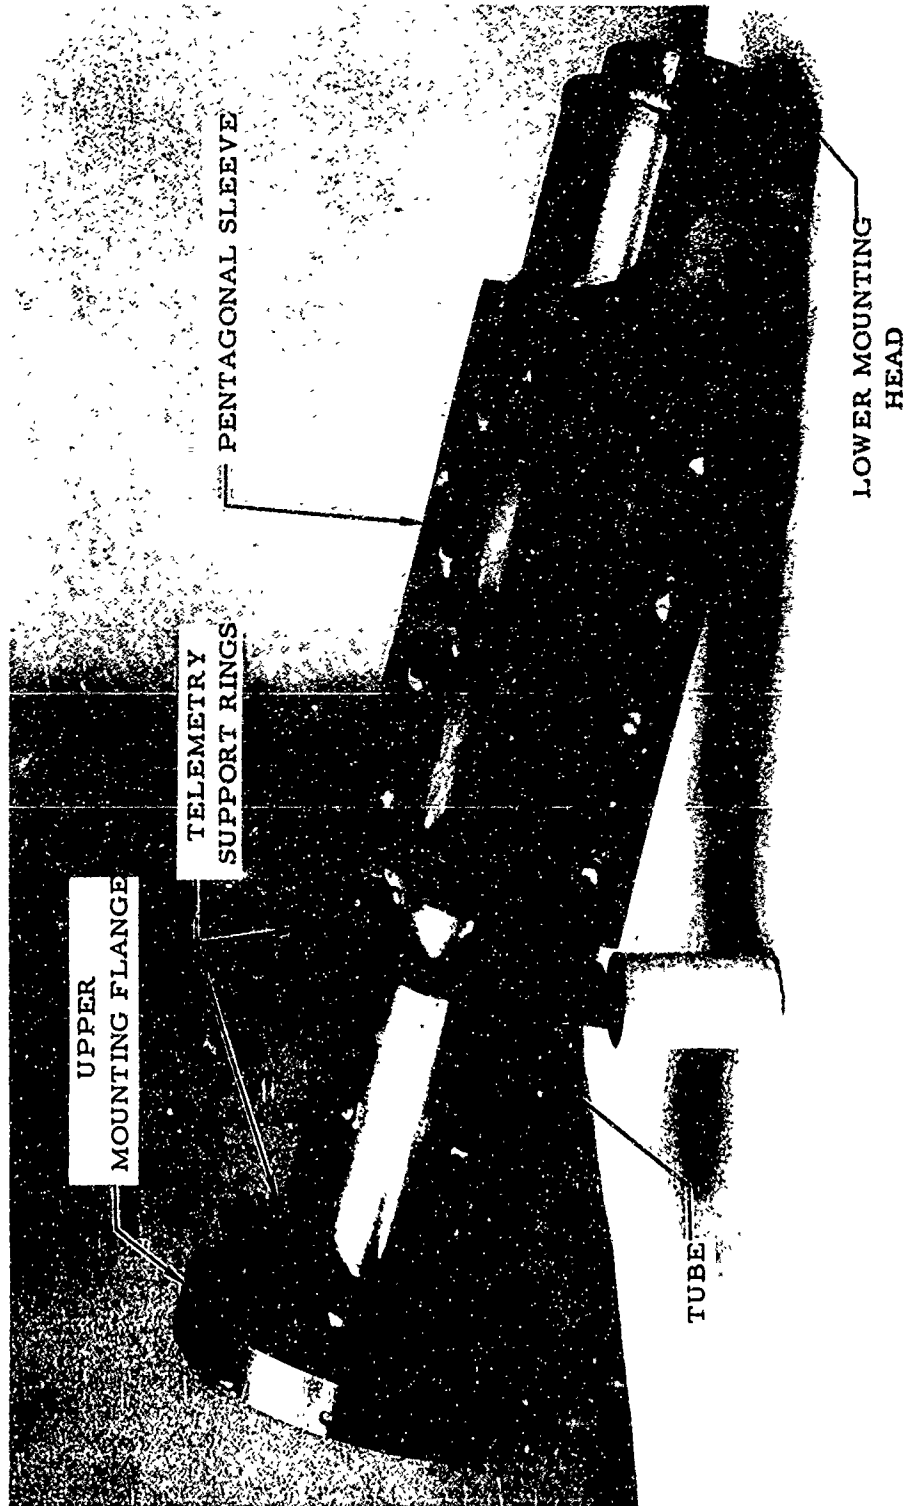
Mechanical Details of Instrumentation Support Tube
